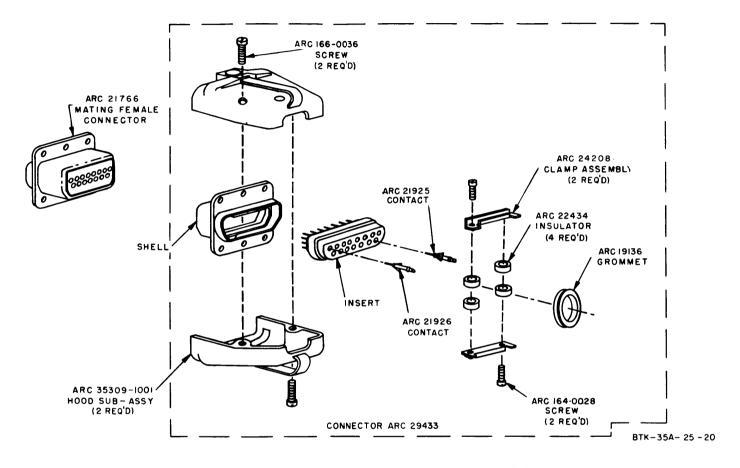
Connectors ARC 21766 and 29433, exploded view.
